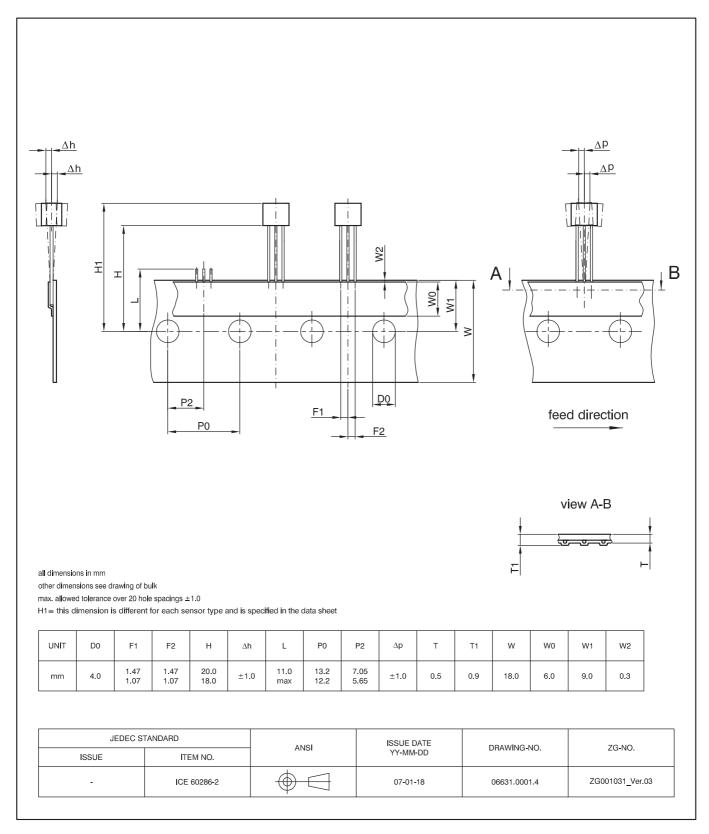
TO92UA/UT-2: Dimensions ammopack inline, not spread
